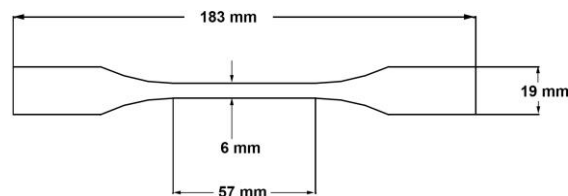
Specimen dimensions for tensile test based on ASTM D638 (Thickness = 4 mm)
